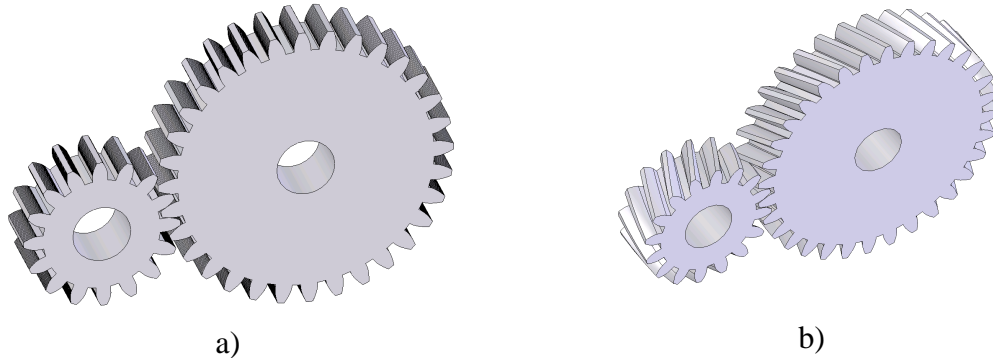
a) A mechanical spur gear. b) A Mechanical helical gear.
